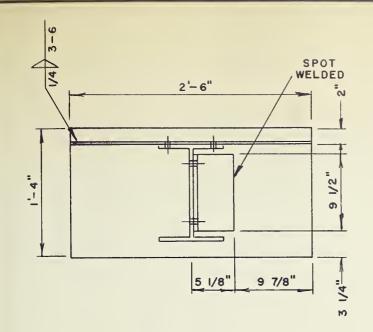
FIG. AI - ASSEMBLY DRAWING OF LOADING FRAME
